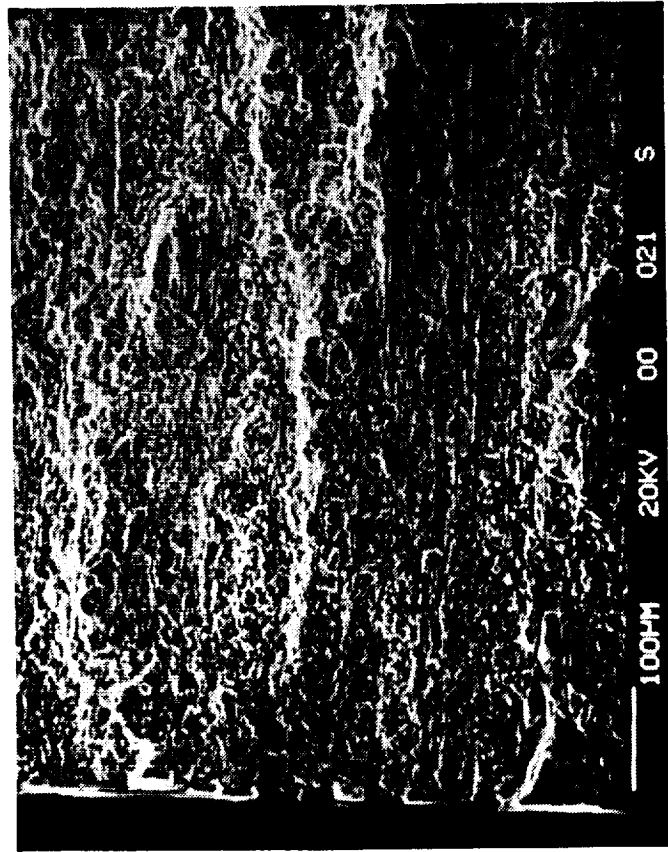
Fracture path and fracture surface morphology of 2090 baseline aged at 160°C for 75 hrs and tested at room temperature.
